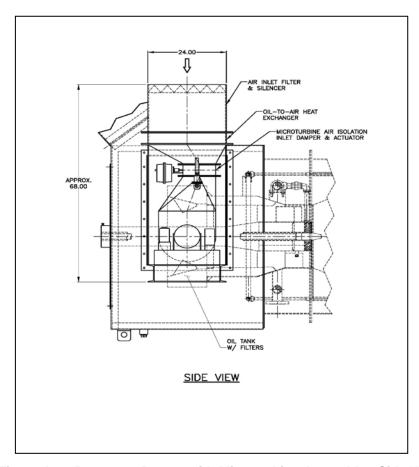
Prototype Burner with Microturbine Assembly - Side View
